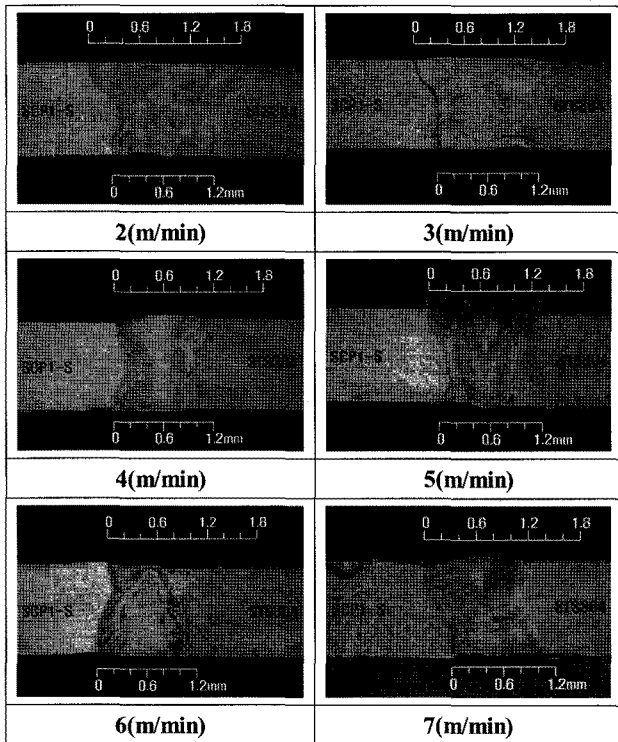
Cross-section and bead shape of dissimilar STS304 and SCPI-S
